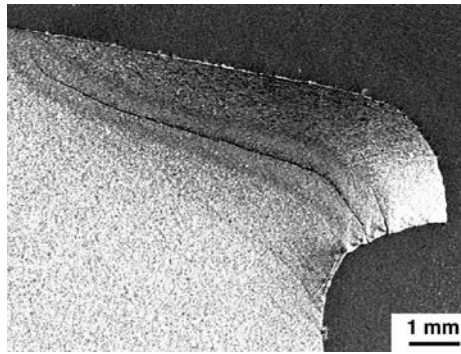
Micrograph showing the edge of the contact face in an H13 disk. Mushrooming is occurring due to contact pressures and resulting metal flow. Cracks resulting from fatigue or fracture at localized shear bands are leading to material removal.
